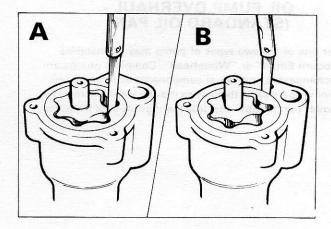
Measuring Rotor Lobe/Body Clearance
